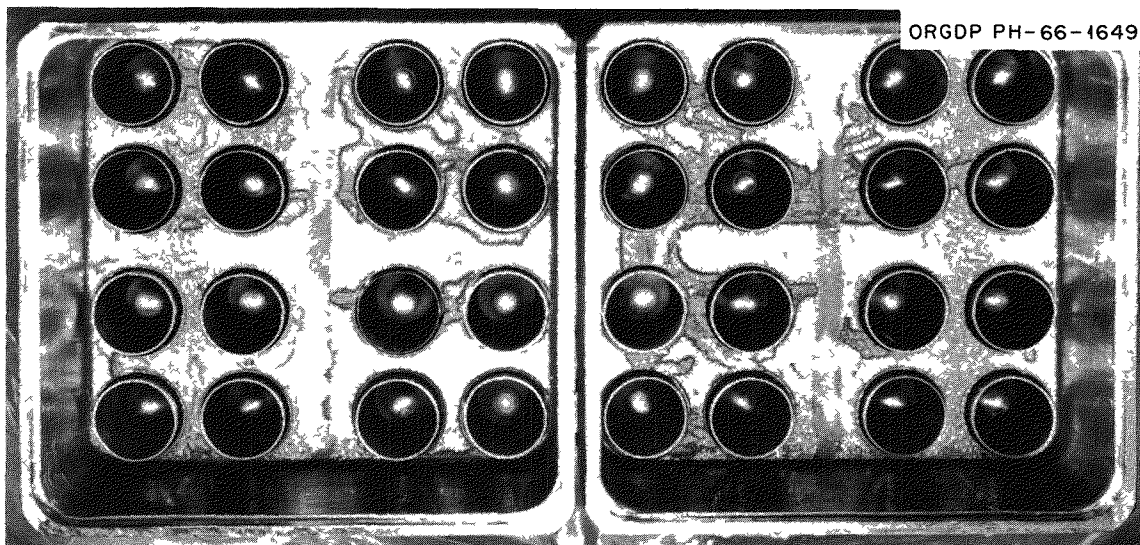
Bottom View of Lower Tube Sheet from Assembly No. 29 Pressure Shell. Note excessive brazing alloy run-through.
